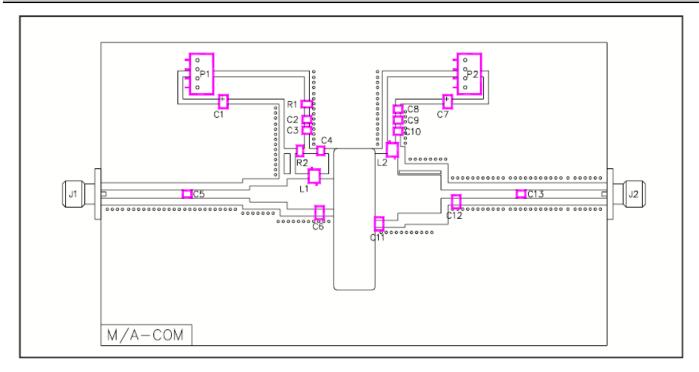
1620—1670 MHZ TEST FIXTURE COMPONENT LAYOUT
